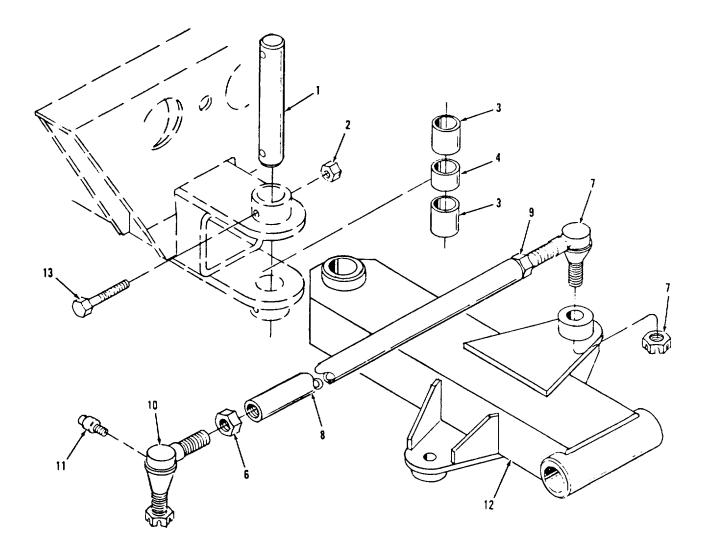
STEERING LINK AND TIE ROD ASSEMBLY
